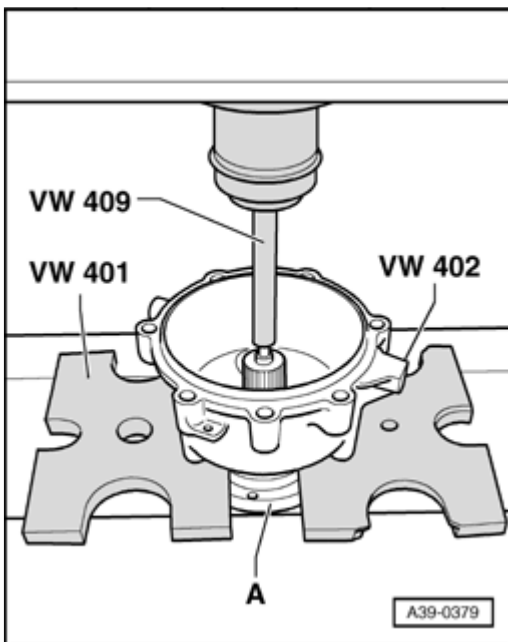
Using Punch VW 409 To Press Flange Shaft Out Of Torsen Differential Cover By Placing Cover On Thrust Plate VW 401 And Thrust Plate VW 402
